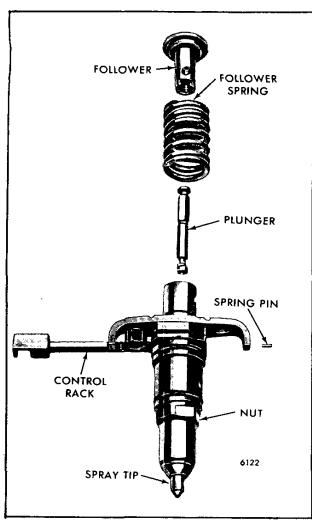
· Injector Plunger, Follower and Relative Location of Parts
